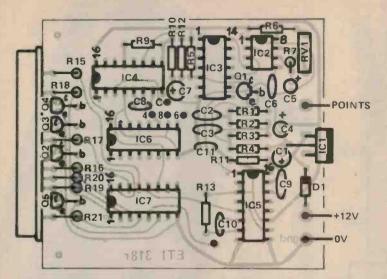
The component overlay for the board. The board is double sided although only the lower surface is shown here. Note the link between the two surfaces of the board near C10.
